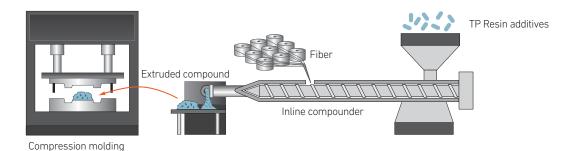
D-LFT process using compression molding. In this diagram, thermoplastic pellets are melted and mixed inline with chopped fiber and then extruded as a charge, which is placed into a compression molding tool and press.
